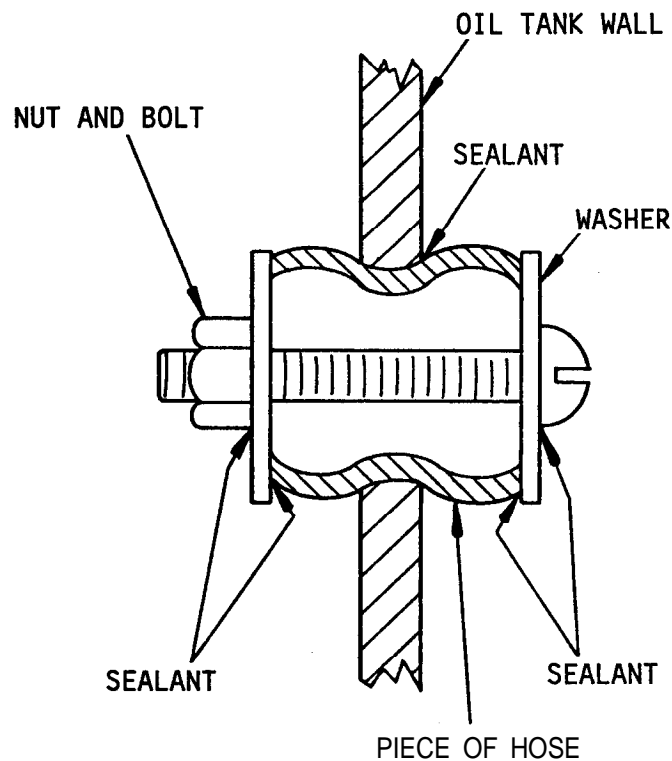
Hose Assembly, Sealant, Nut and Bolt
